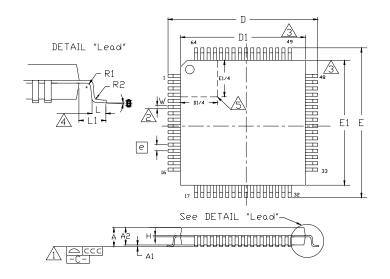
64 Pin TQFP Package Outline (10x10x1.4 mm body - 2 mm footprint)
